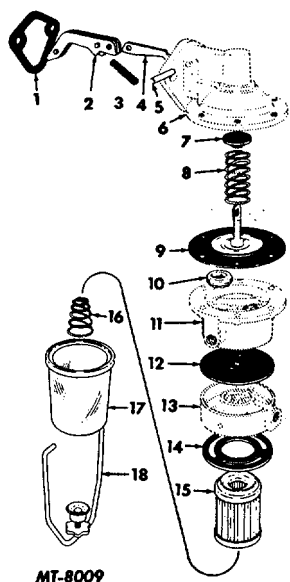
Exploded View of Suspended Bowl Type Fuel Pump
